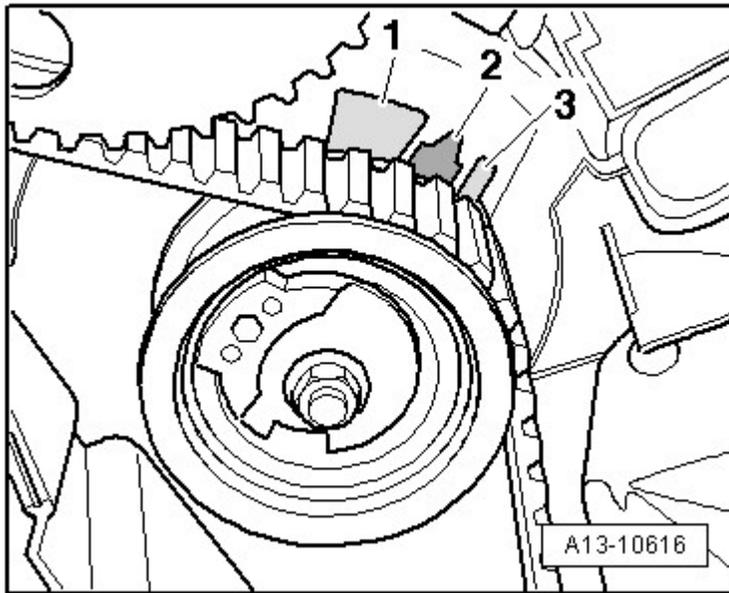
Identifying Tensioning Roller Pointer & Tabs
